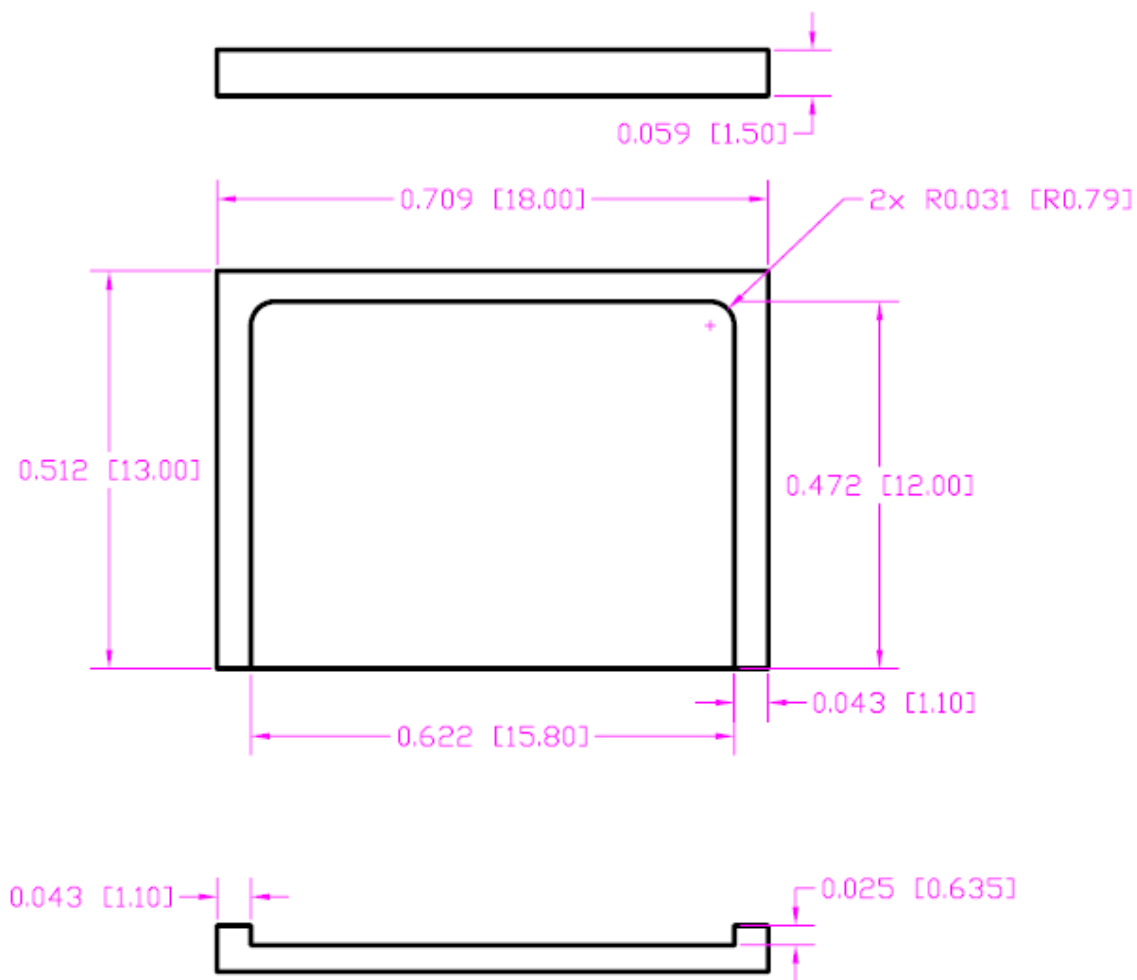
Schematic drawing of the bottom half of the suitcase (drawn by Emerson & Cuming): Back view (top drawing), top view (centre) and front view (bottom). The dimensions for each section are given in inches [centimetres].
